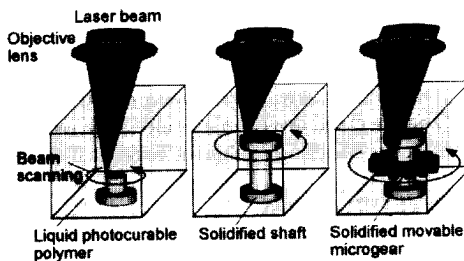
Assembly-free, single-step fabrication process of movable micromachines
